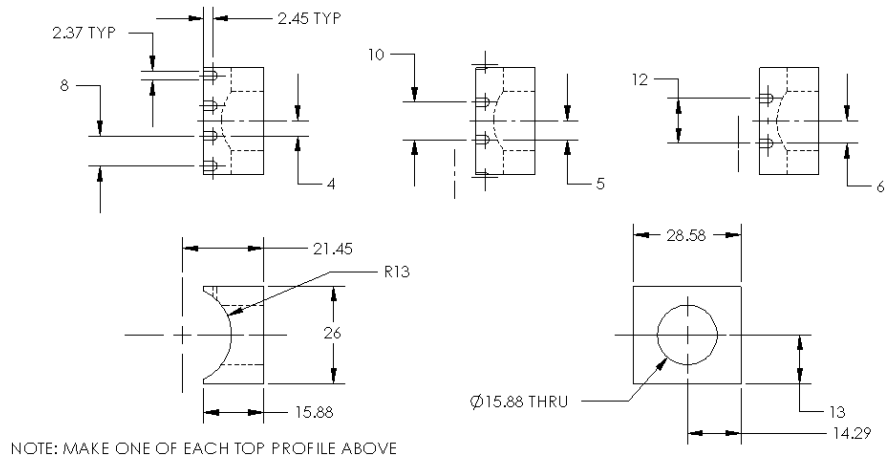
Machining Drawing for Side Blocks, with Dimensions in millimeters
